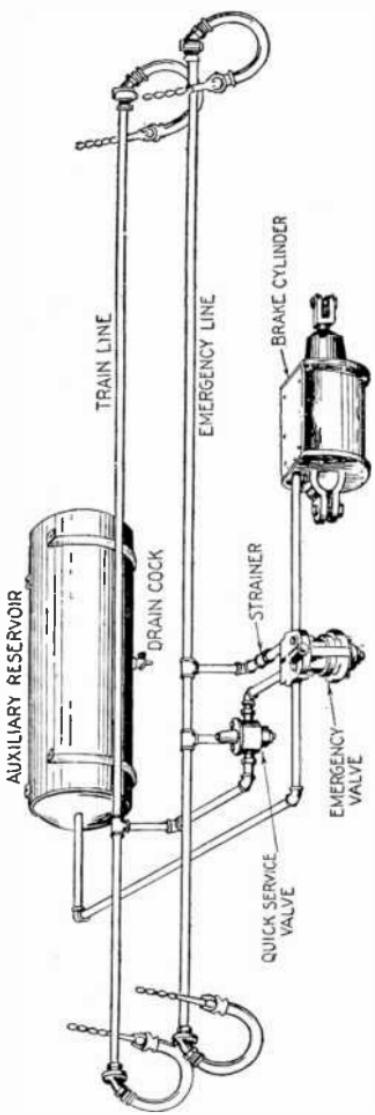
,305.—General Electric emergency straight air brake equipment for trail car.
